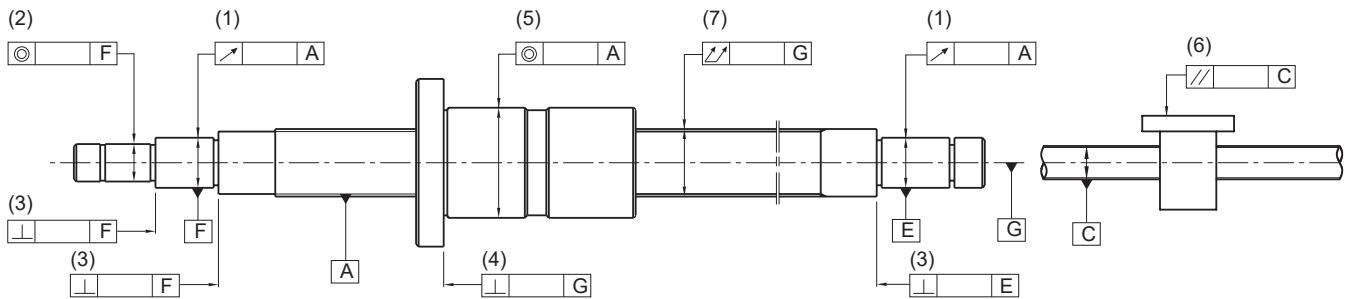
Mounting Accuracy and Tolerance
